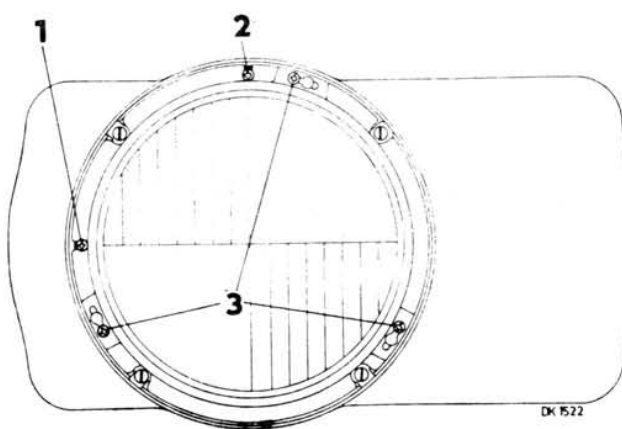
/2 - Adjusting and Fastening Screws of Right-hand Headlamps - their location on left-hand headlamps is their mirror reflection
